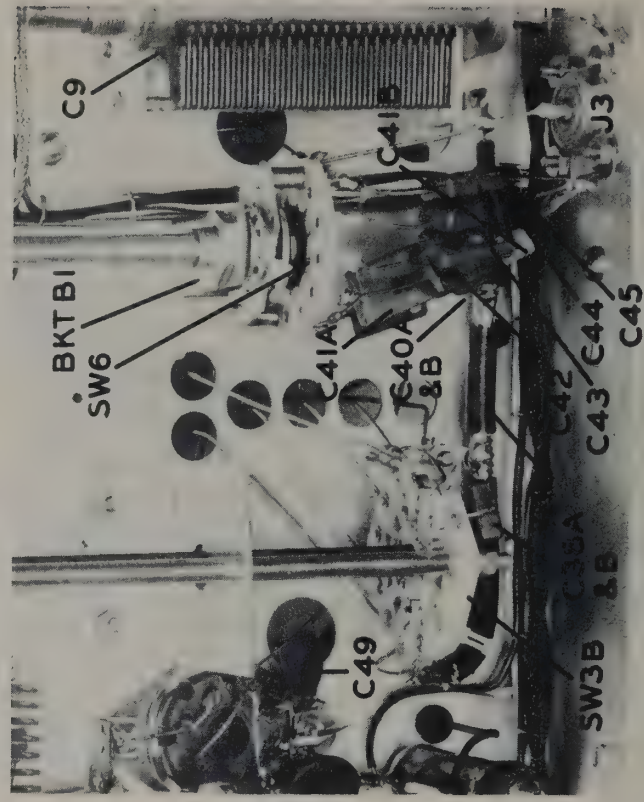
C. R.F. FINAL BOTTOM VIEW
